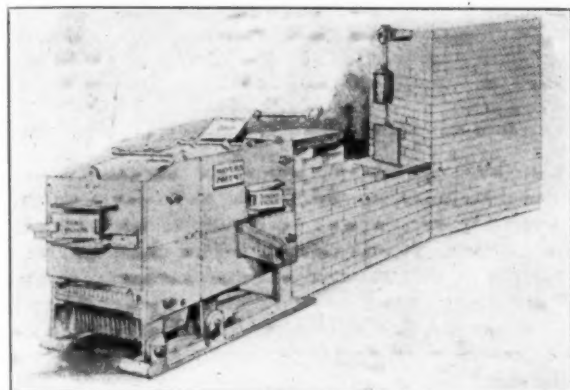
PERSPECTIVE VIEW OF REVERBORATORY FURNACE.
